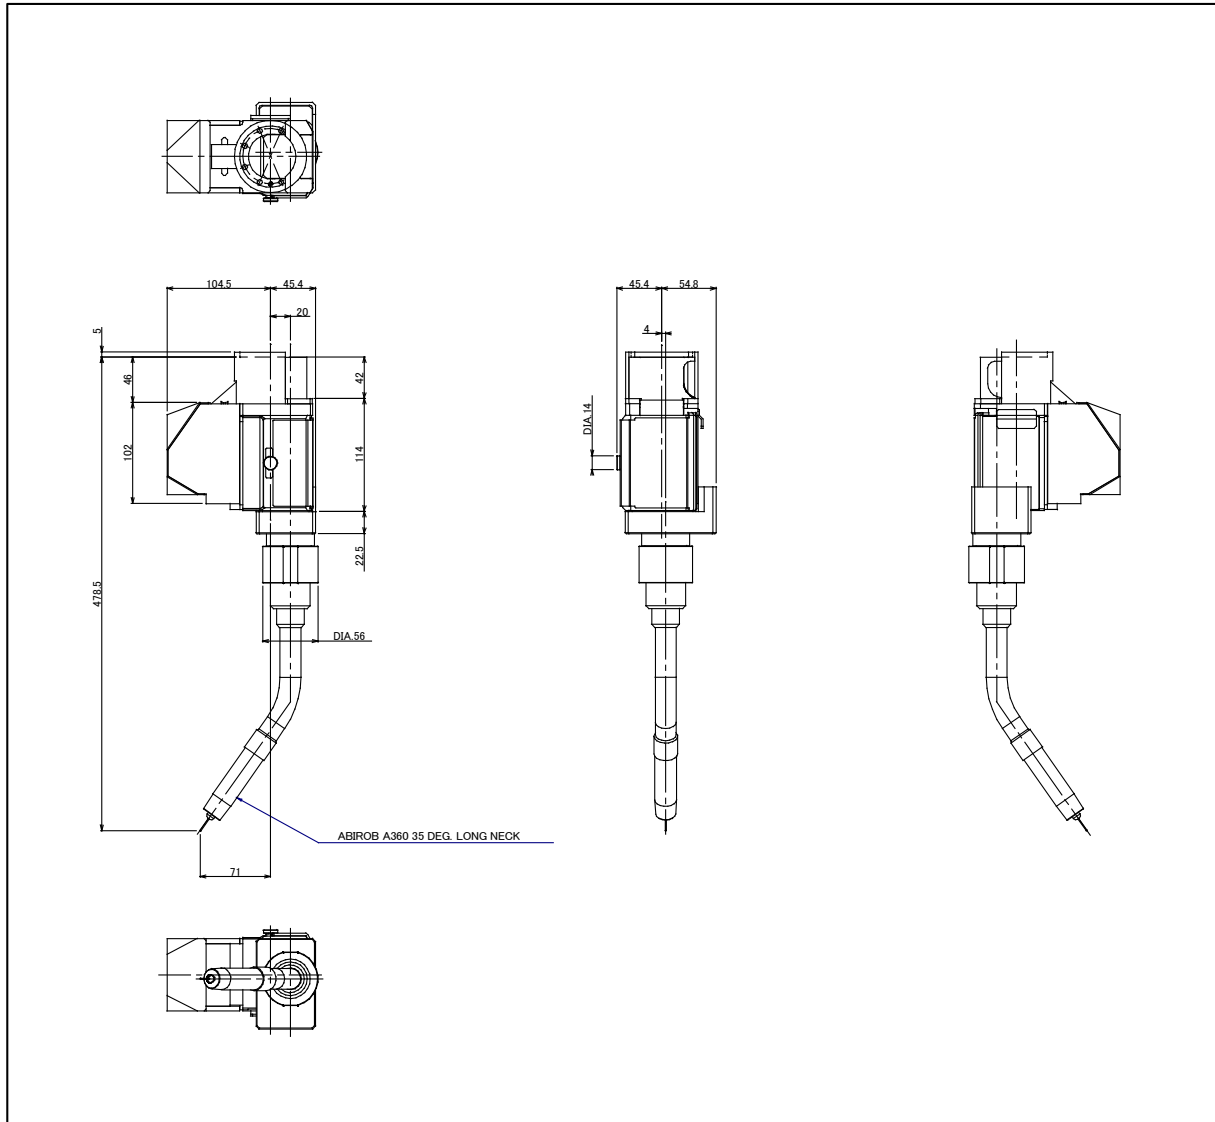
(b) External dimension (Servo torch for mild steel)
